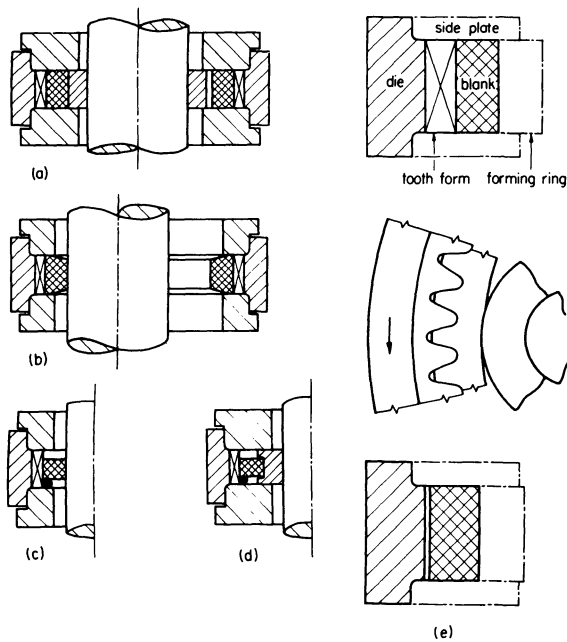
Workpiece shapes and tool arrangements. (a) Full-width workpiece and forming ring. (b) Tapered workpiece formed directly by mandrel. (c) Narrow workpiece supported centrally by a rubber O-ring. (d) Narrow workpiece rolled by a grooved forming ring.
